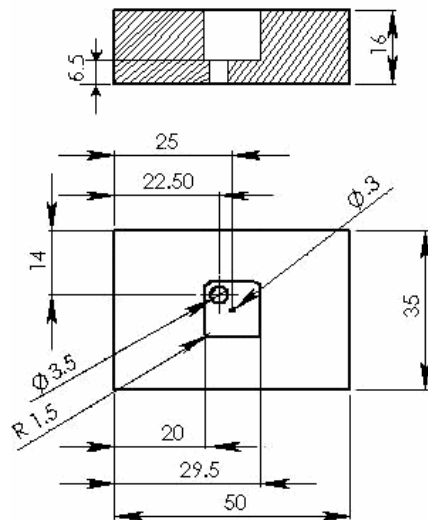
Drawing for mold 1 (Material: aluminum, dimensions: mm);
